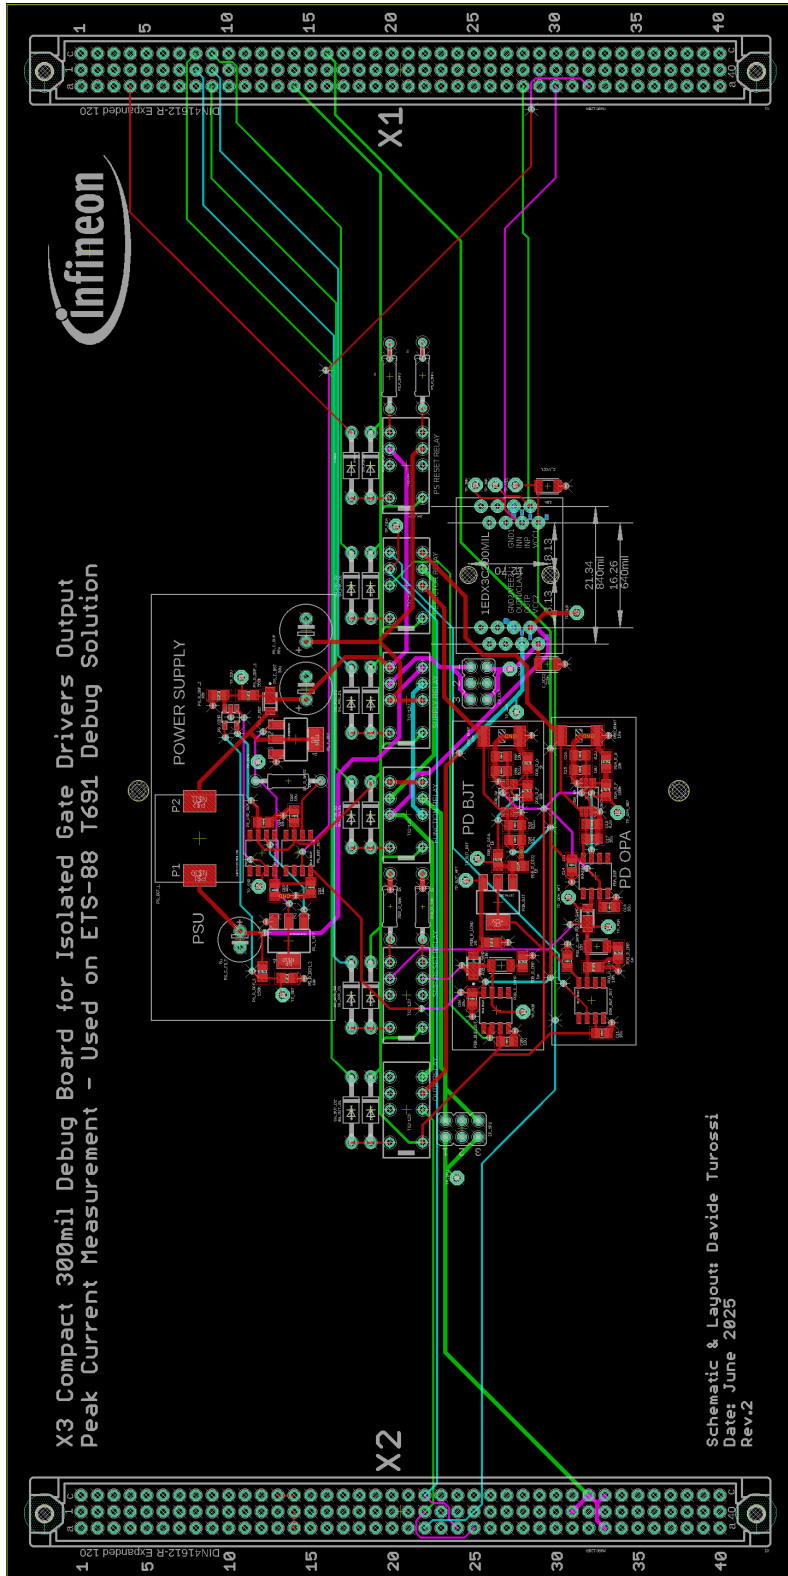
EAGLE PCB layout view of the peak current measurement circuit
